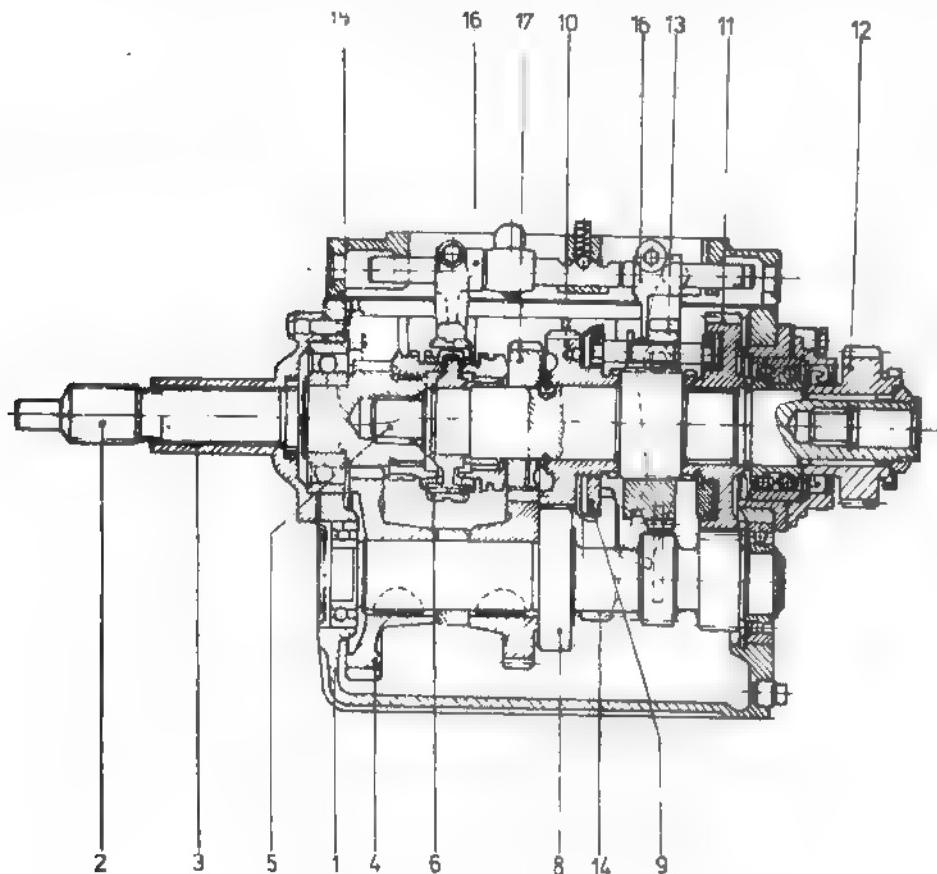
GEARBOX LONGITUDINAL SECTION
